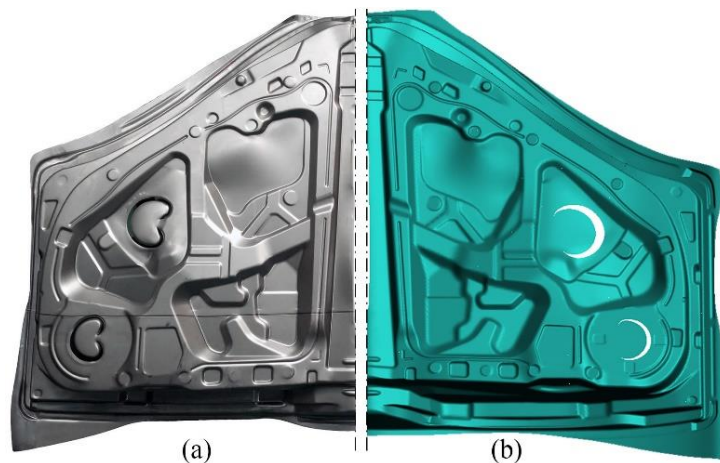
(a) Tryout part in the experiment; (b) the drawing part of the simulation
